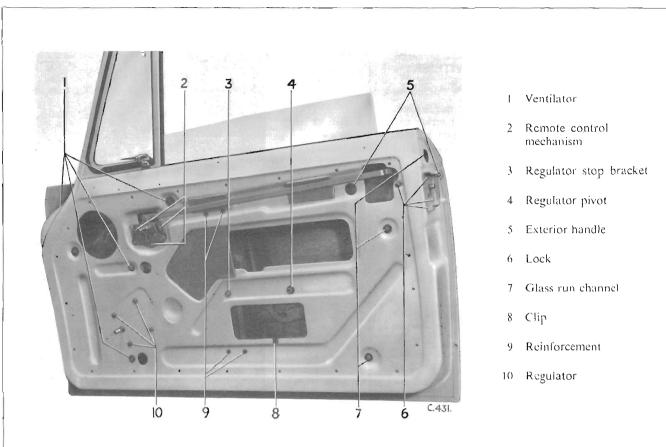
Location of door component fixings (Herald 1200, 12/50 and Vitesse)
